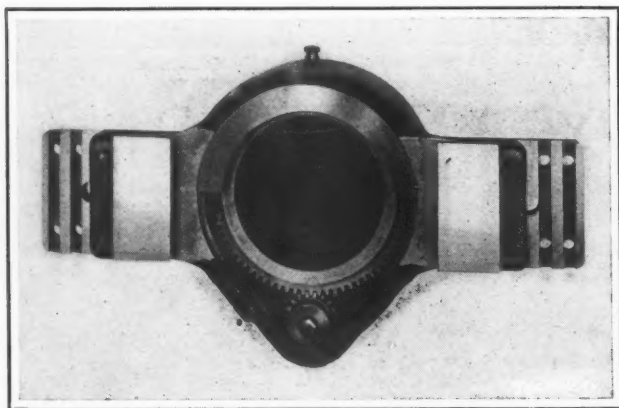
Rear View of Milling Attachment, showing Adjustable Gibs and Method of driving Spindle
